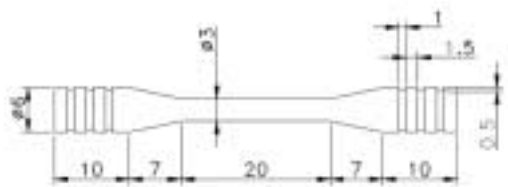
Dimensions of specimen used for tensile test (unit: mm).
